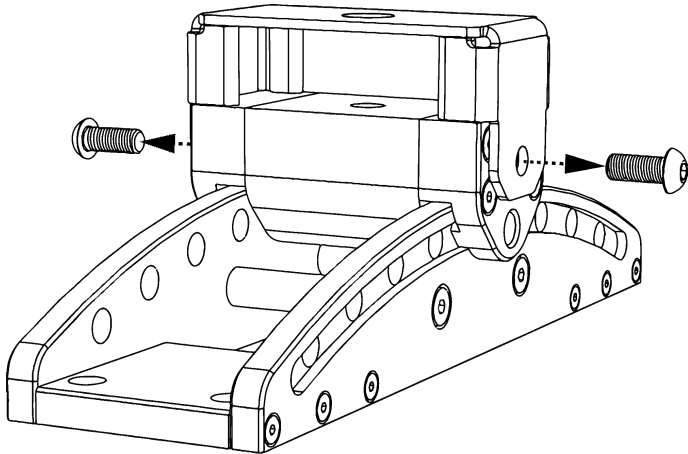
Threaded inserts for the Contour Rigging System on the bottom of CT28.
